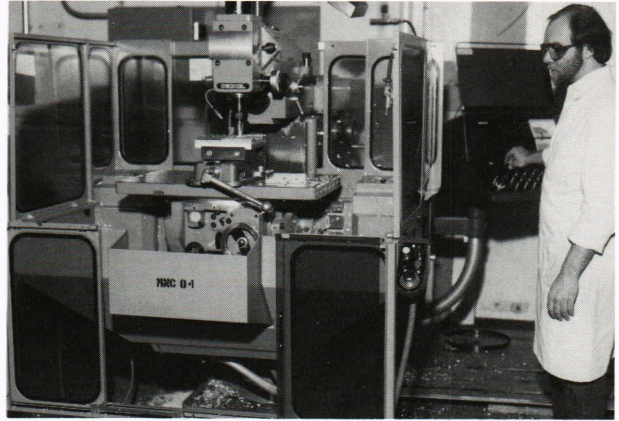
An experimental machinist operating the Deckel FP3 numerical control horizontal/vertical milling machine that was used to machine the antenna base.
